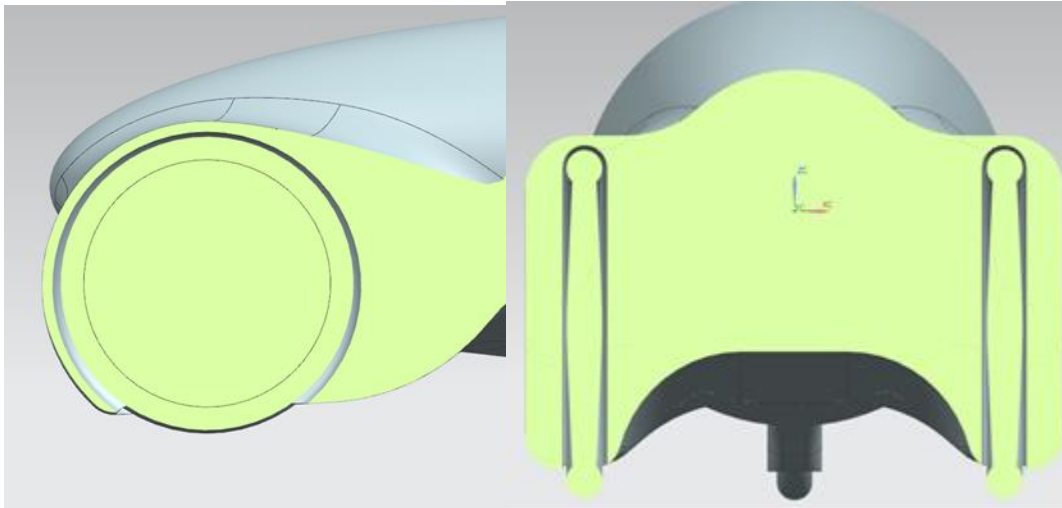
Cross Sections of front and side views for front wheel wells.
